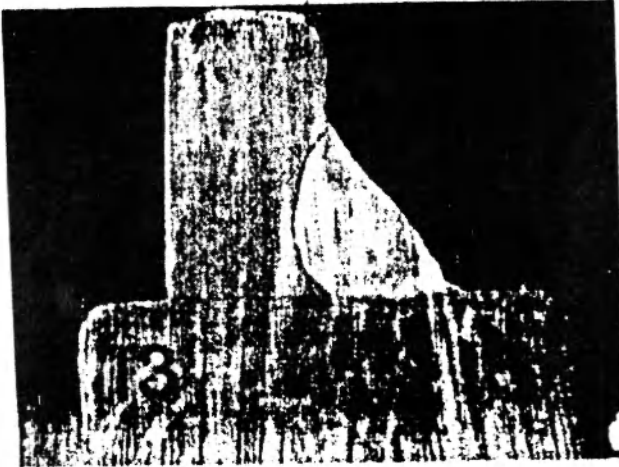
Macrosection of fillet weld : Conventional MIG
